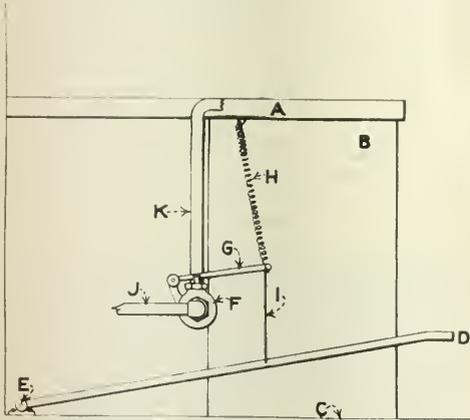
SIDE VIEW OF FOOT LEVER AND CONNECTIONS
